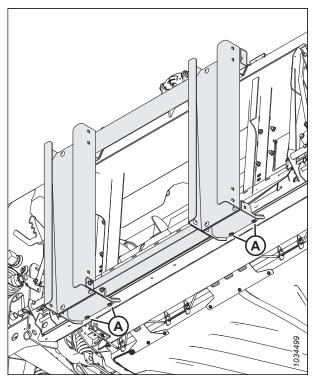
Shipping Supports on Float Module – View from Bottom Rear
